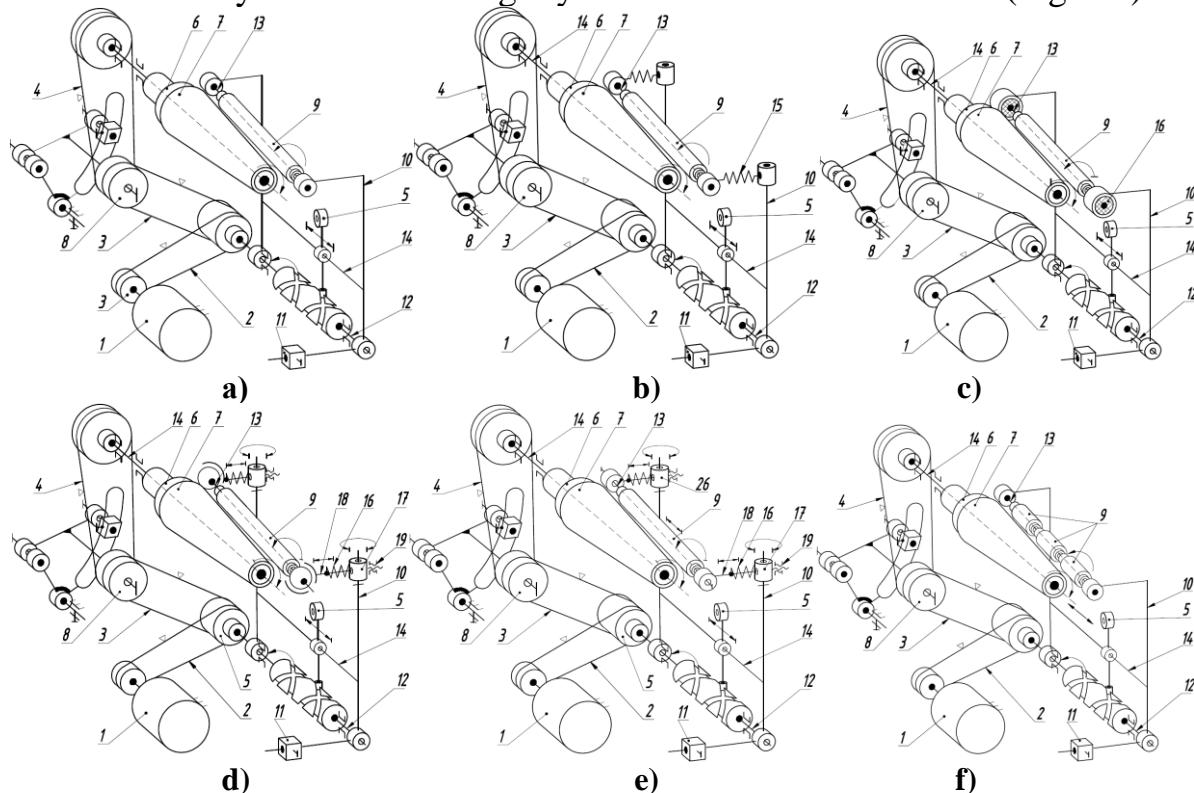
Structures of mounting mechanisms of the rolling roller:
